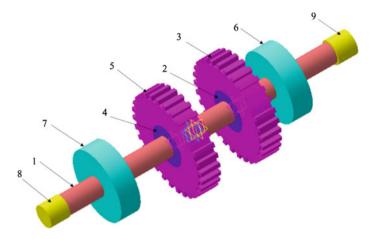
A hypothetical assembly. 1—Shaft, 2 & 4—Bearings, 3 & 5—Gears, 6 & 7—Rotating discs, 8 & 9—Nuts
